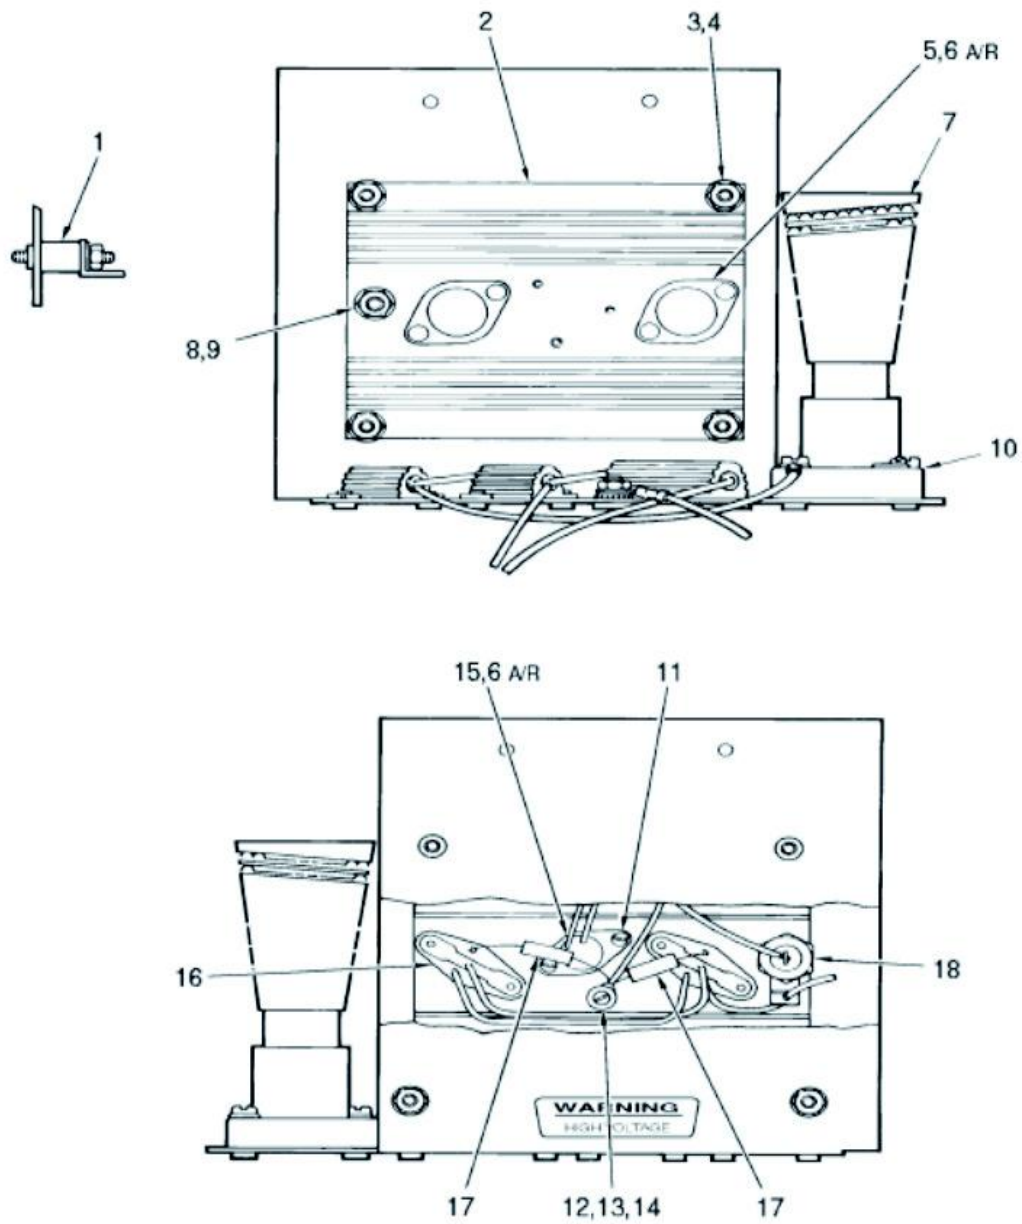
RC5C PLUS Constant Current Brake Assembly
